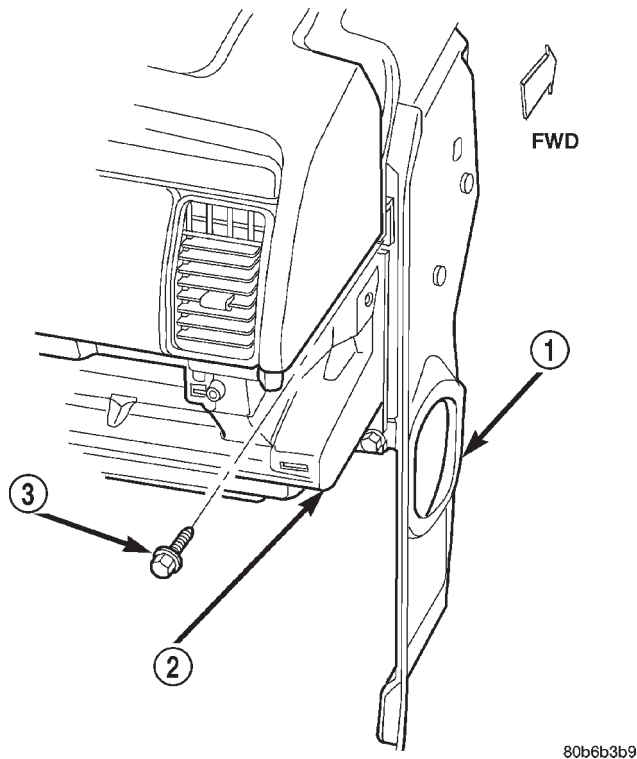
Instrument Panel to Passenger Side Cowl Side Inner Panel Mounting
